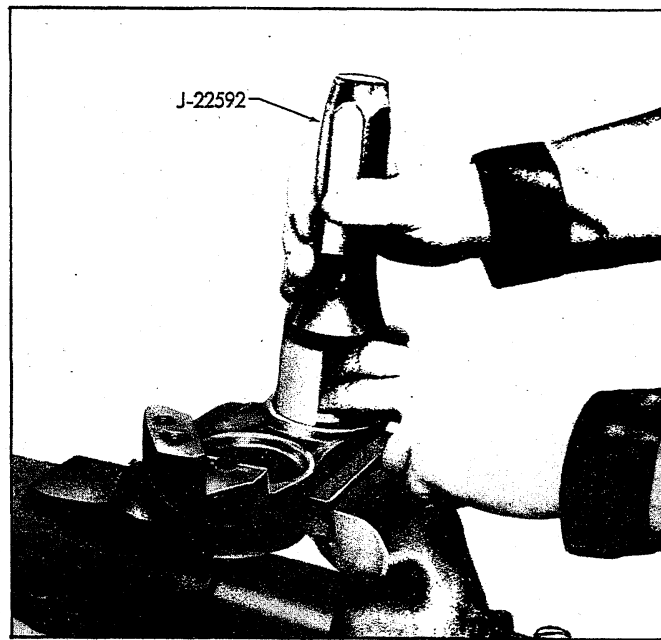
Installing Boot Seal in Caliper Bore Using Tool J-22592
